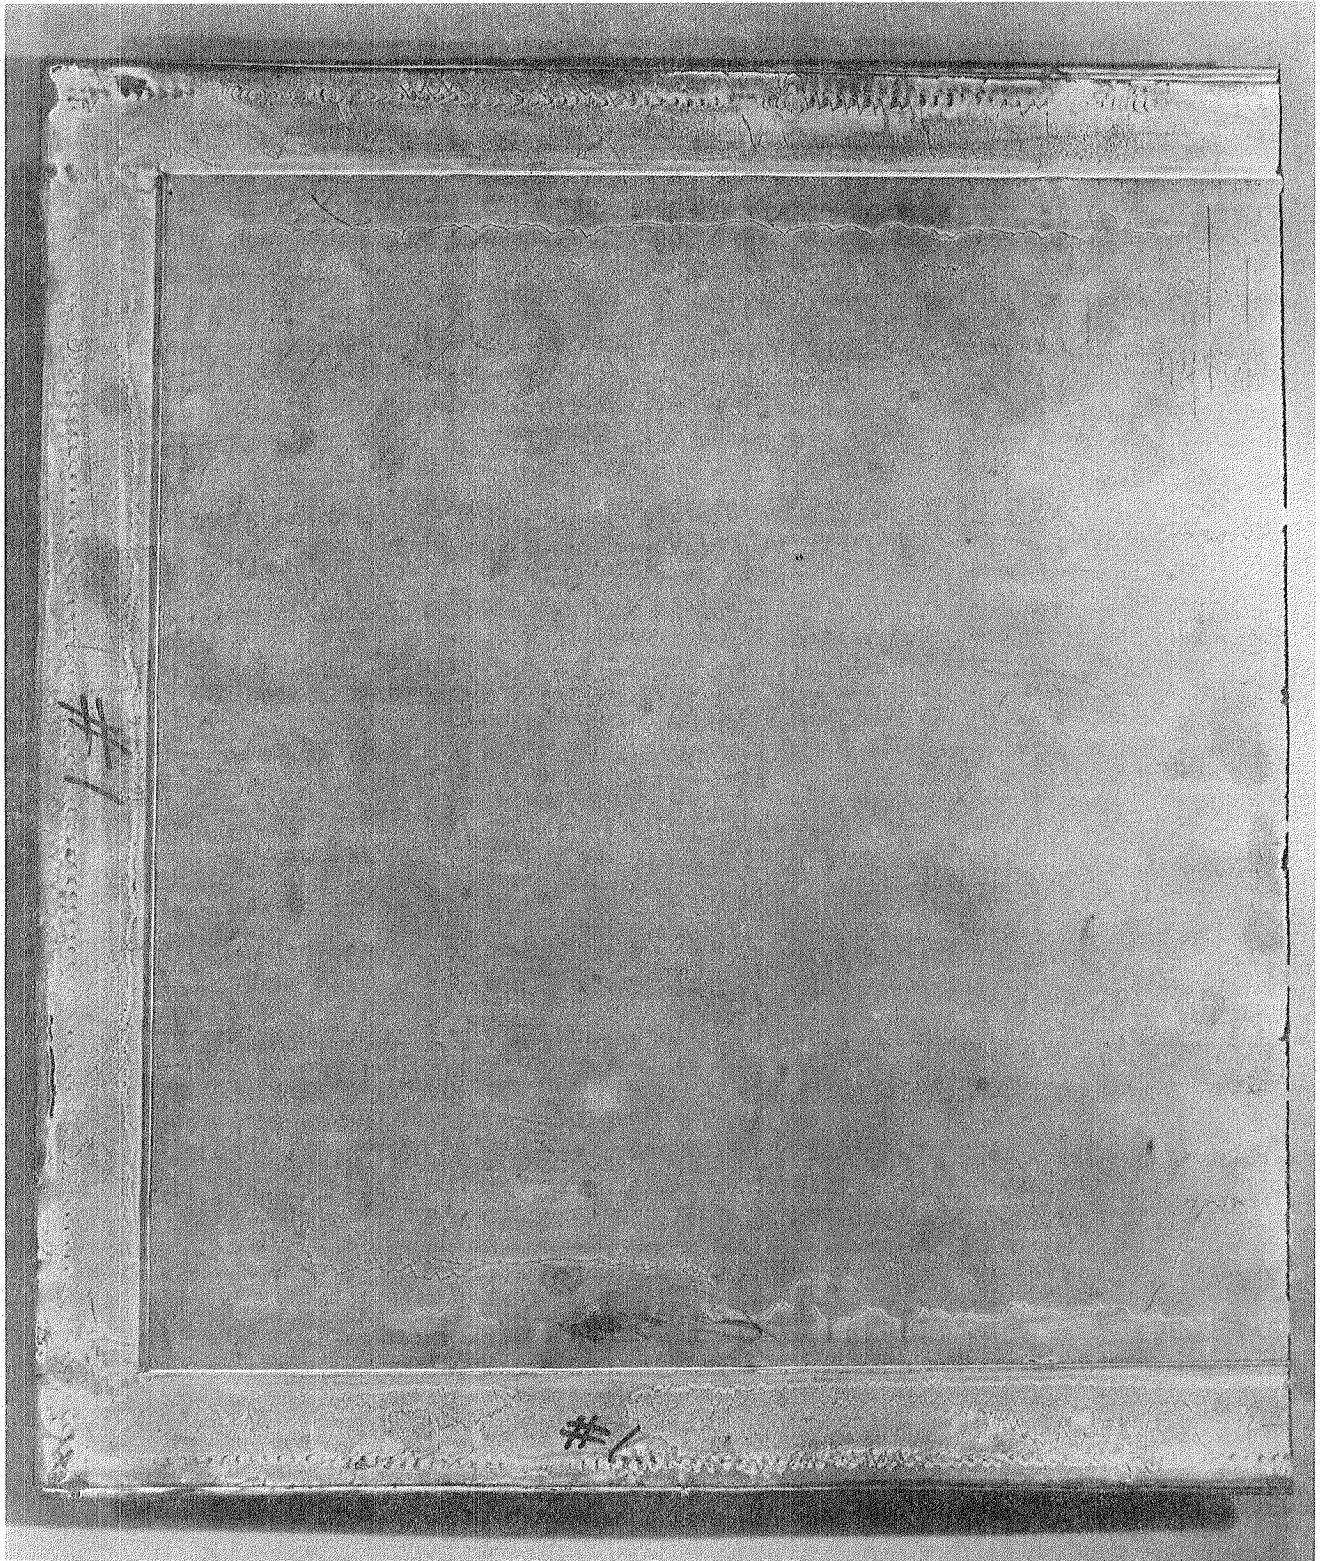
PANEL NO. 1 TOP FACE SHEET
